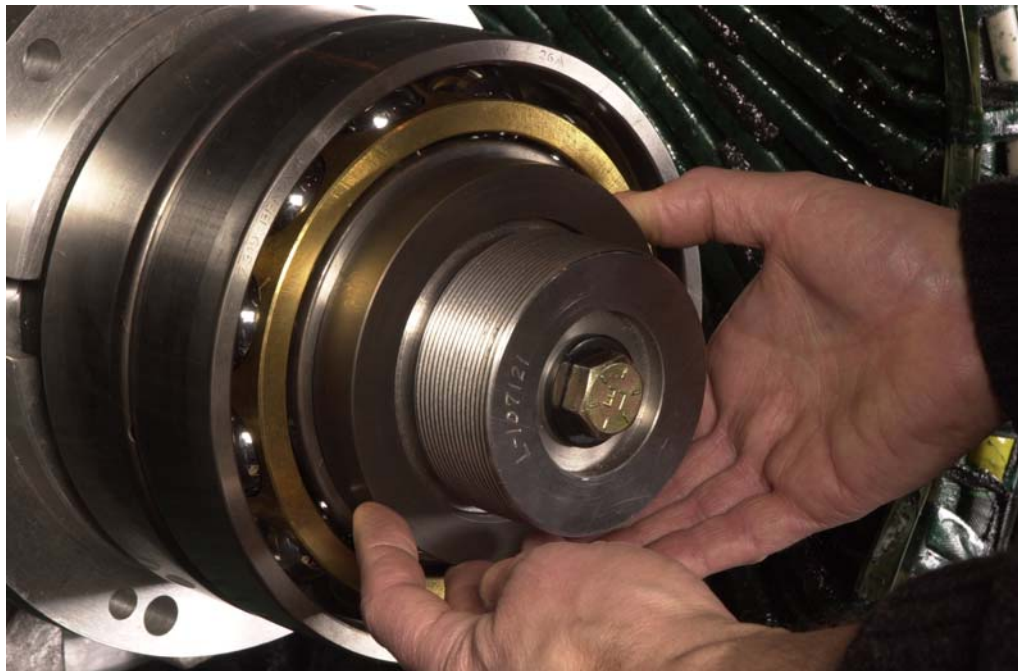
Install the hydraulic assembly nut (NUT0730) onto the threaded extension
